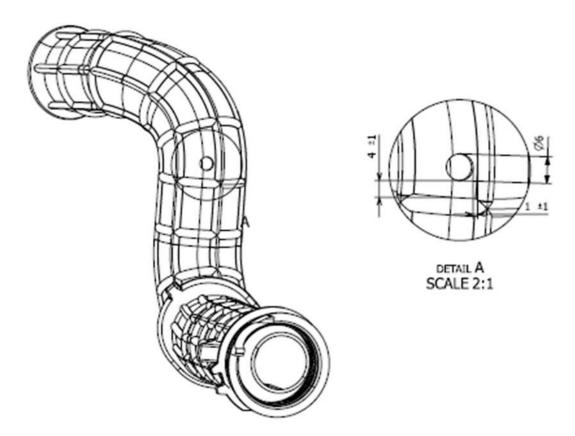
Dimensions and hole distances on the Tube AC Connecting K25G product
